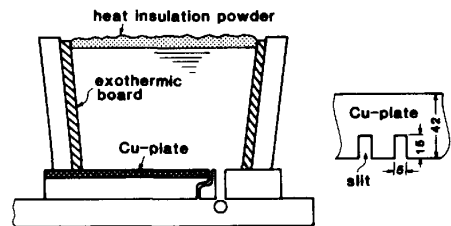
Mold Assembly with Watercooled Cu-Stool
